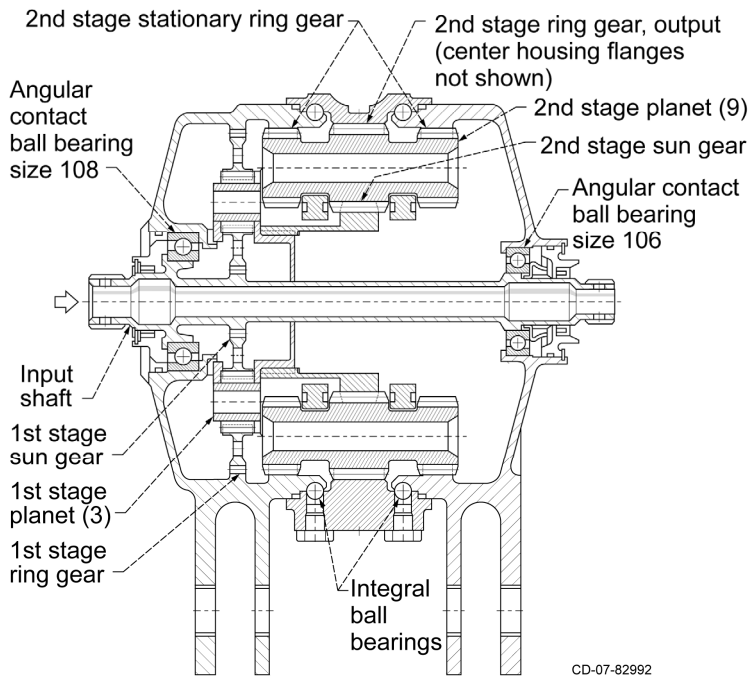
Body flap actuator cross section showing input shaft bearings.
